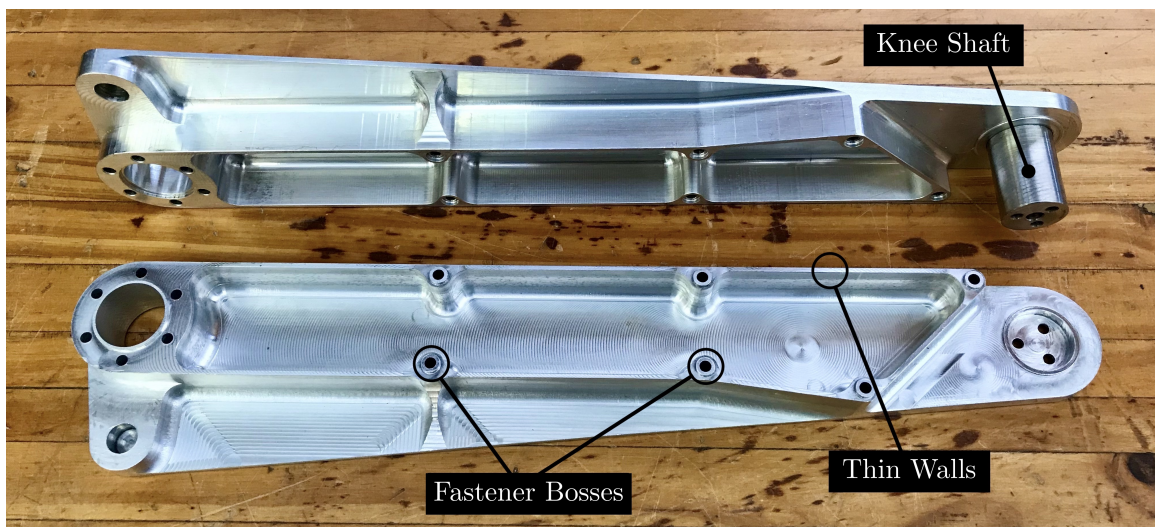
Separated femur halves with inserted steel knee shaft showing internal thin walled box shape and fastener bosses.
